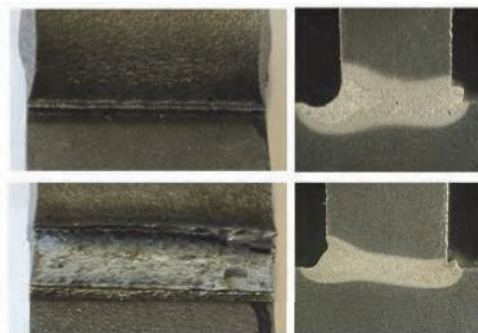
Fracture tested flat folded full penetration laser welds, view from root side. Up: Laser power 5 kW, welding speed 0.5 m/min, line energy 600 J/mm; Down: Laser power 6 kW, welding speed 1.25 m/min, line energy 206 J/mm. On the left are the samples after fracture testing.
